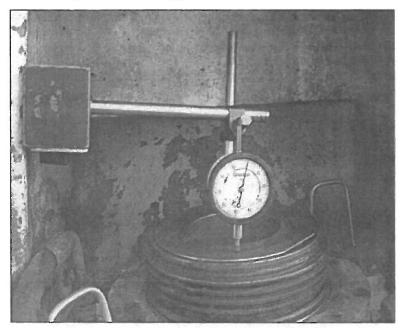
Checking Main Shaft End Float and Face Run-Out
